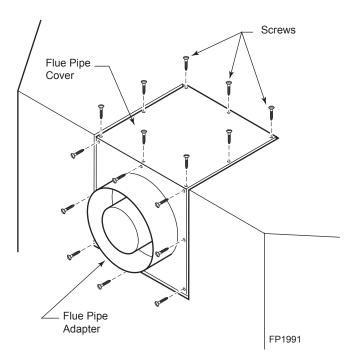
Remove 16 Screws from Flue Pipe Adapter and Flue Pipe Cover
